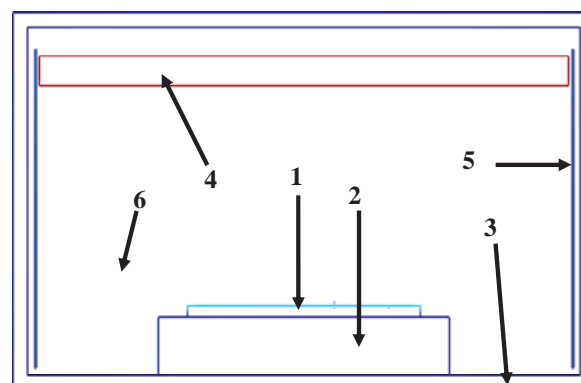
Scheme welding oven with infrared heaters: 1 – experimental sample; 2 – fixture accessory for the detail; 3 – corps; 4 – infrared heaters; 5 – aluminum foil; 6 – air
